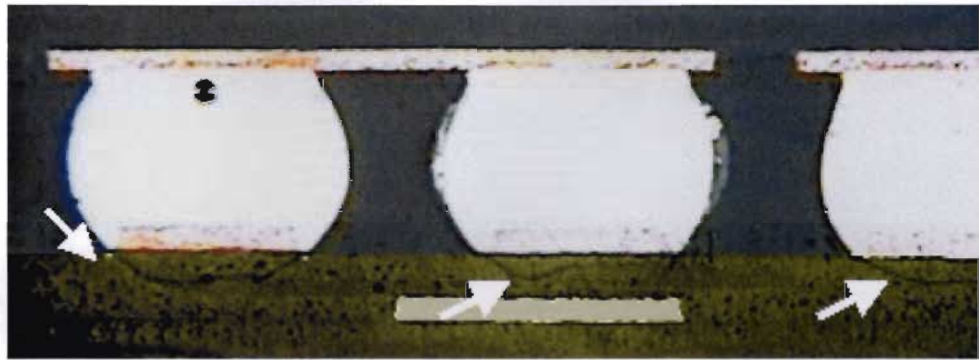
Cracked resin layer under pads for several solder joints, edge bonded
